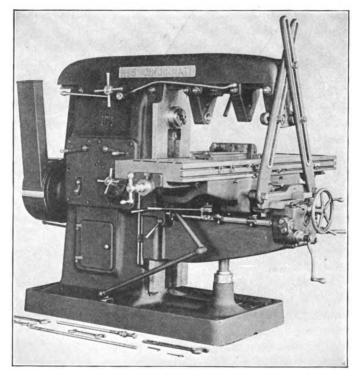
Cincinnati No. 5 plain high-power milling machine with constant speed drive.
